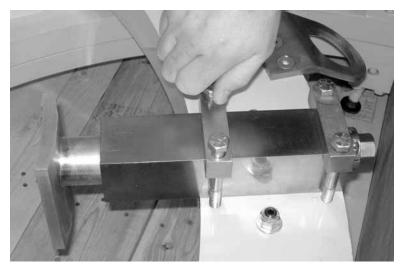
Install the leg mounting brackets and tighten the screws.
